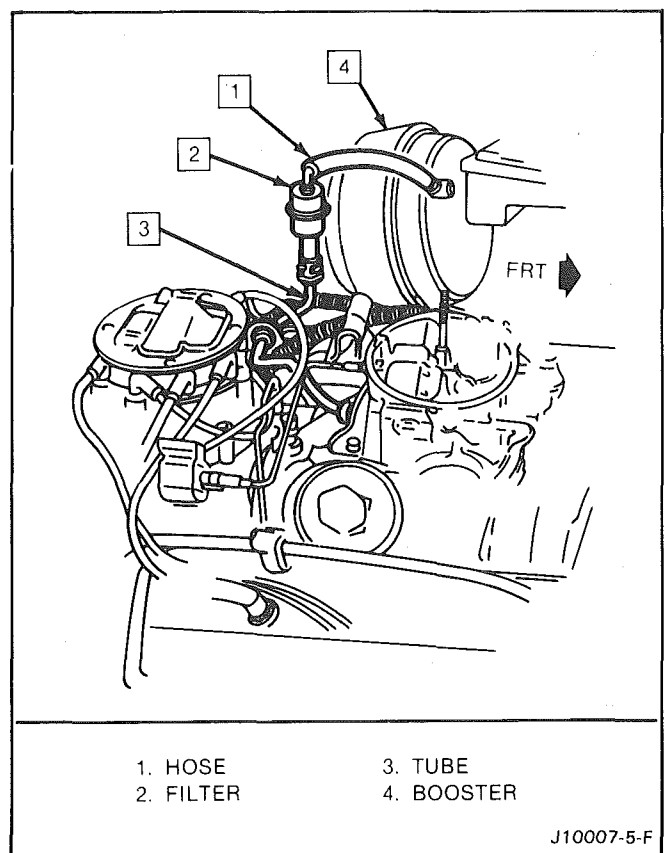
Power Brake Vacuum Hose Filter (Typical)
